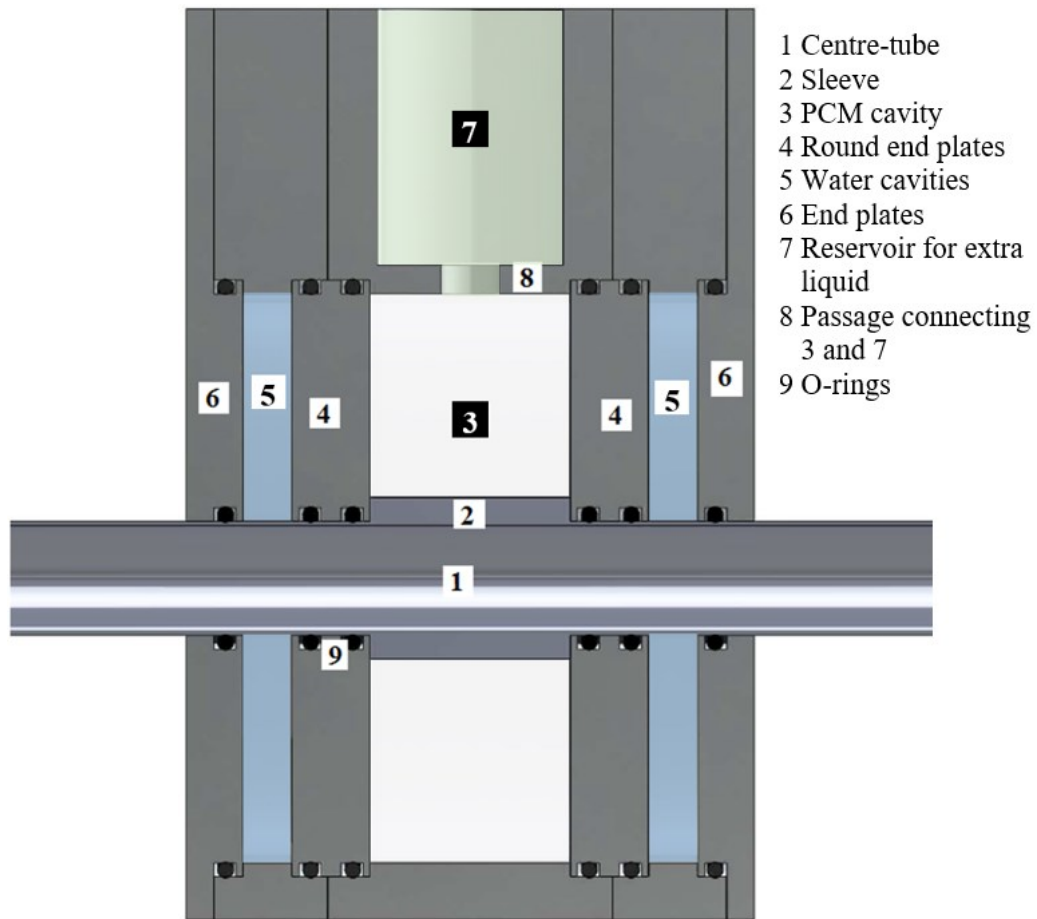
Sectional view of the PCM enclosure with the center-tube diameter of 36 mm.
